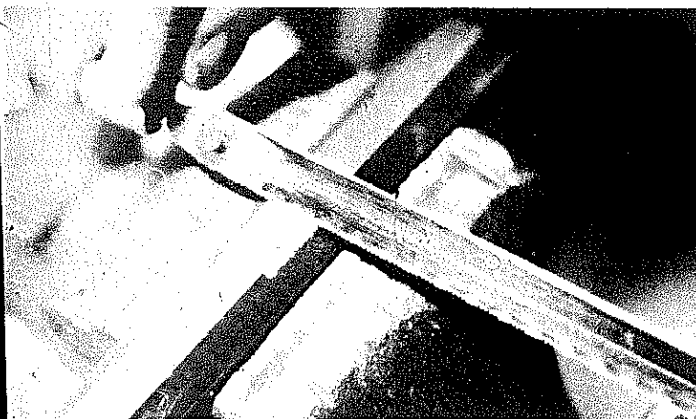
Hershel cuts the dovetail groove in the barrel for one of the lugs. He also uses this dovetail notch to mount the front and rear sights.
